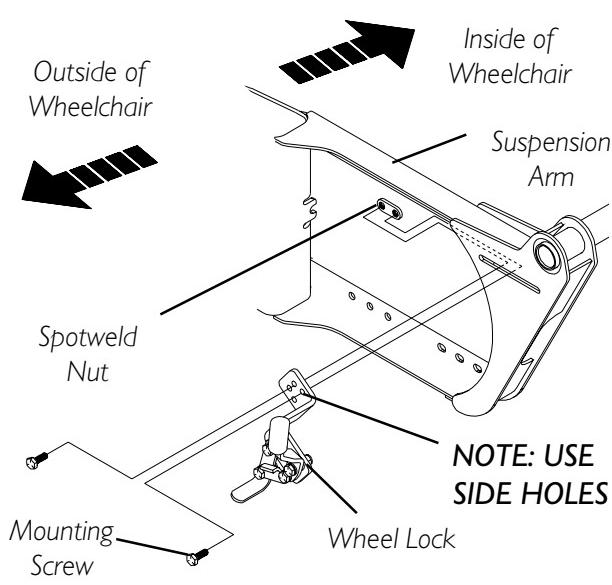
INSTALLING WHEEL LOCKS FOR STANDARD GEARLESS/BRUSHLESS MOTOR ASSEMBLIES
